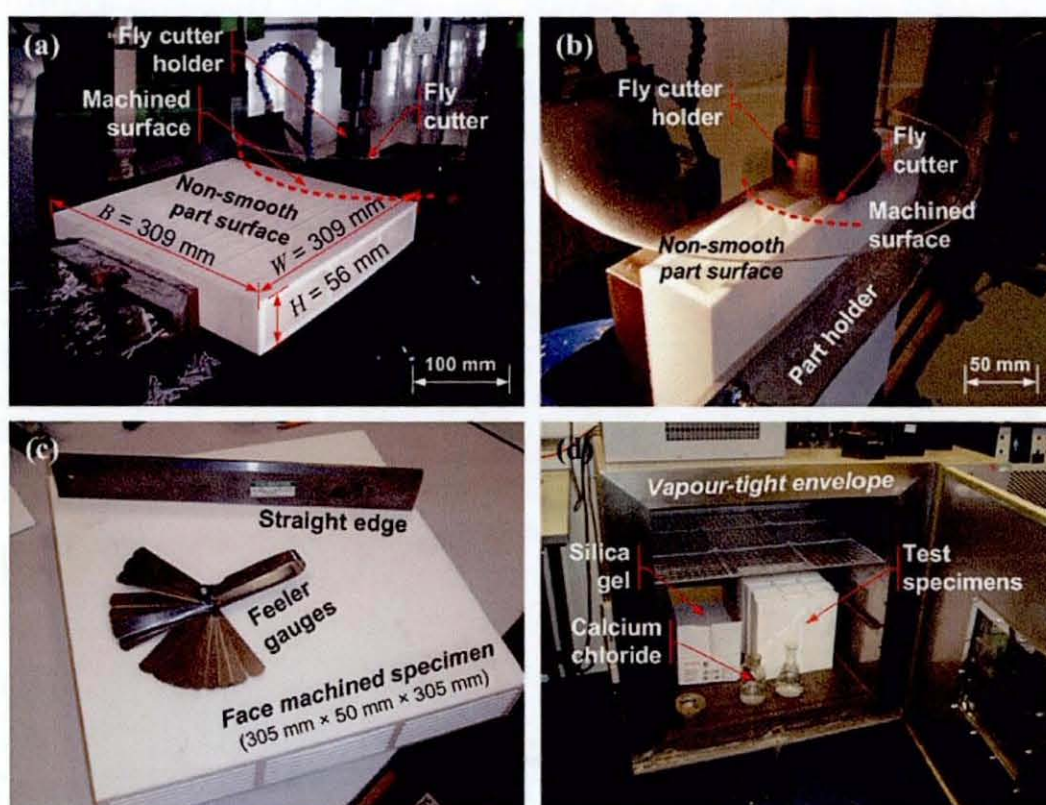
Post-processing and preparation of test specimens: (a) Contact surface machining; (b) opening edge surface machining; (c) surface flatness inspection; (d) specimen conditioning.
